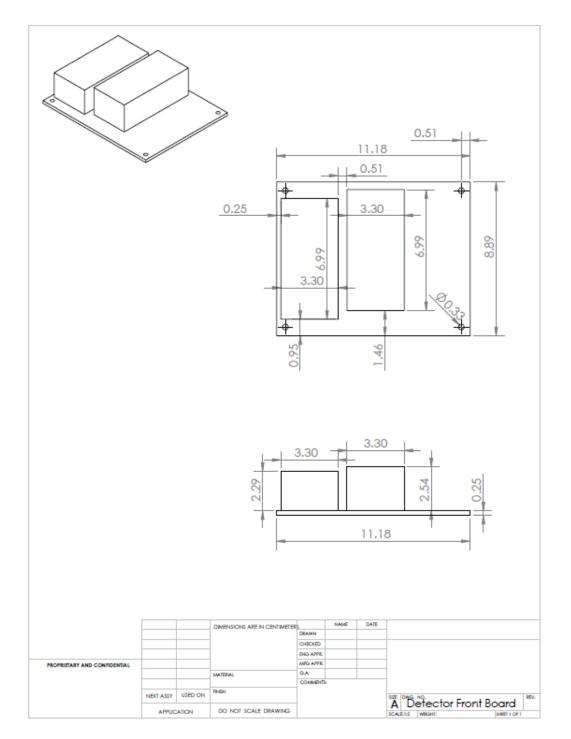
Mechanical drawing of the detector board including the electromagnetic shields with dimensions in centimeters.
